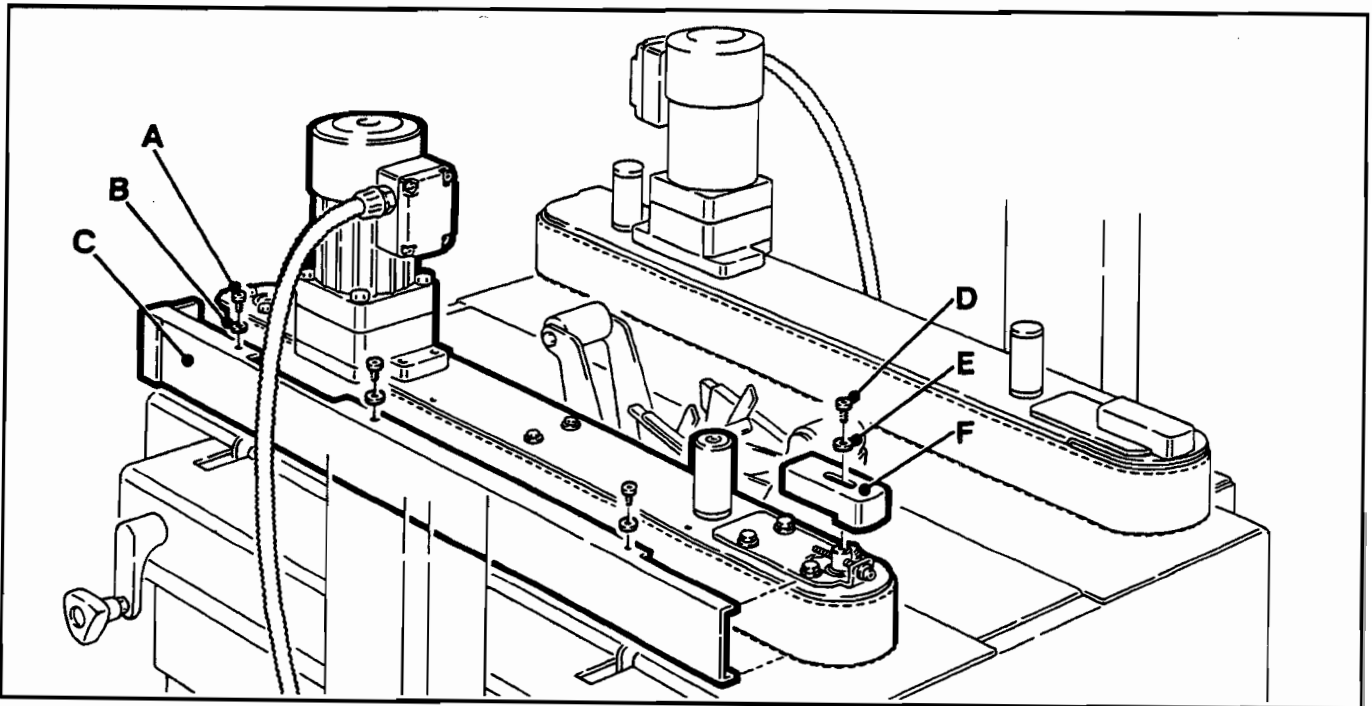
Box Drive Belt (Left Side View - Infeed End)
